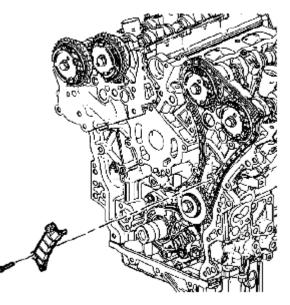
Identifying Left Bank Secondary Camshaft Drive Chain Guide Courtesy of SUZUKI OF AMERICA CORP.
